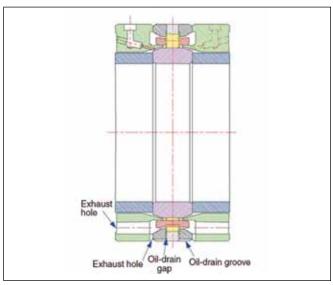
Oil-drain/groove-structure, NU-type cylindrical roller bearing.
